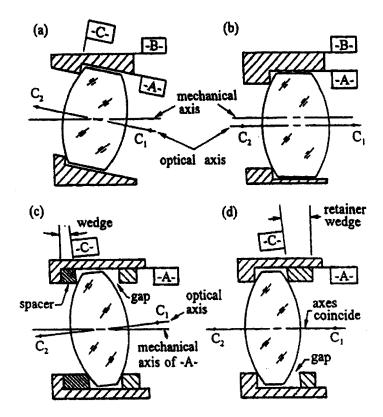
Lens alignment errors in either rim- or surface-contact mountings that result from errors in machining the mount.
